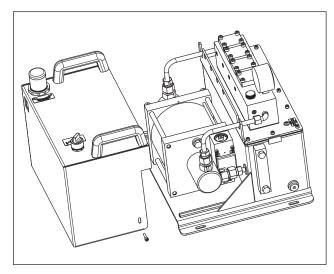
Pump Shroud Removal (Note: air tubing removed for illustrative purposes)
